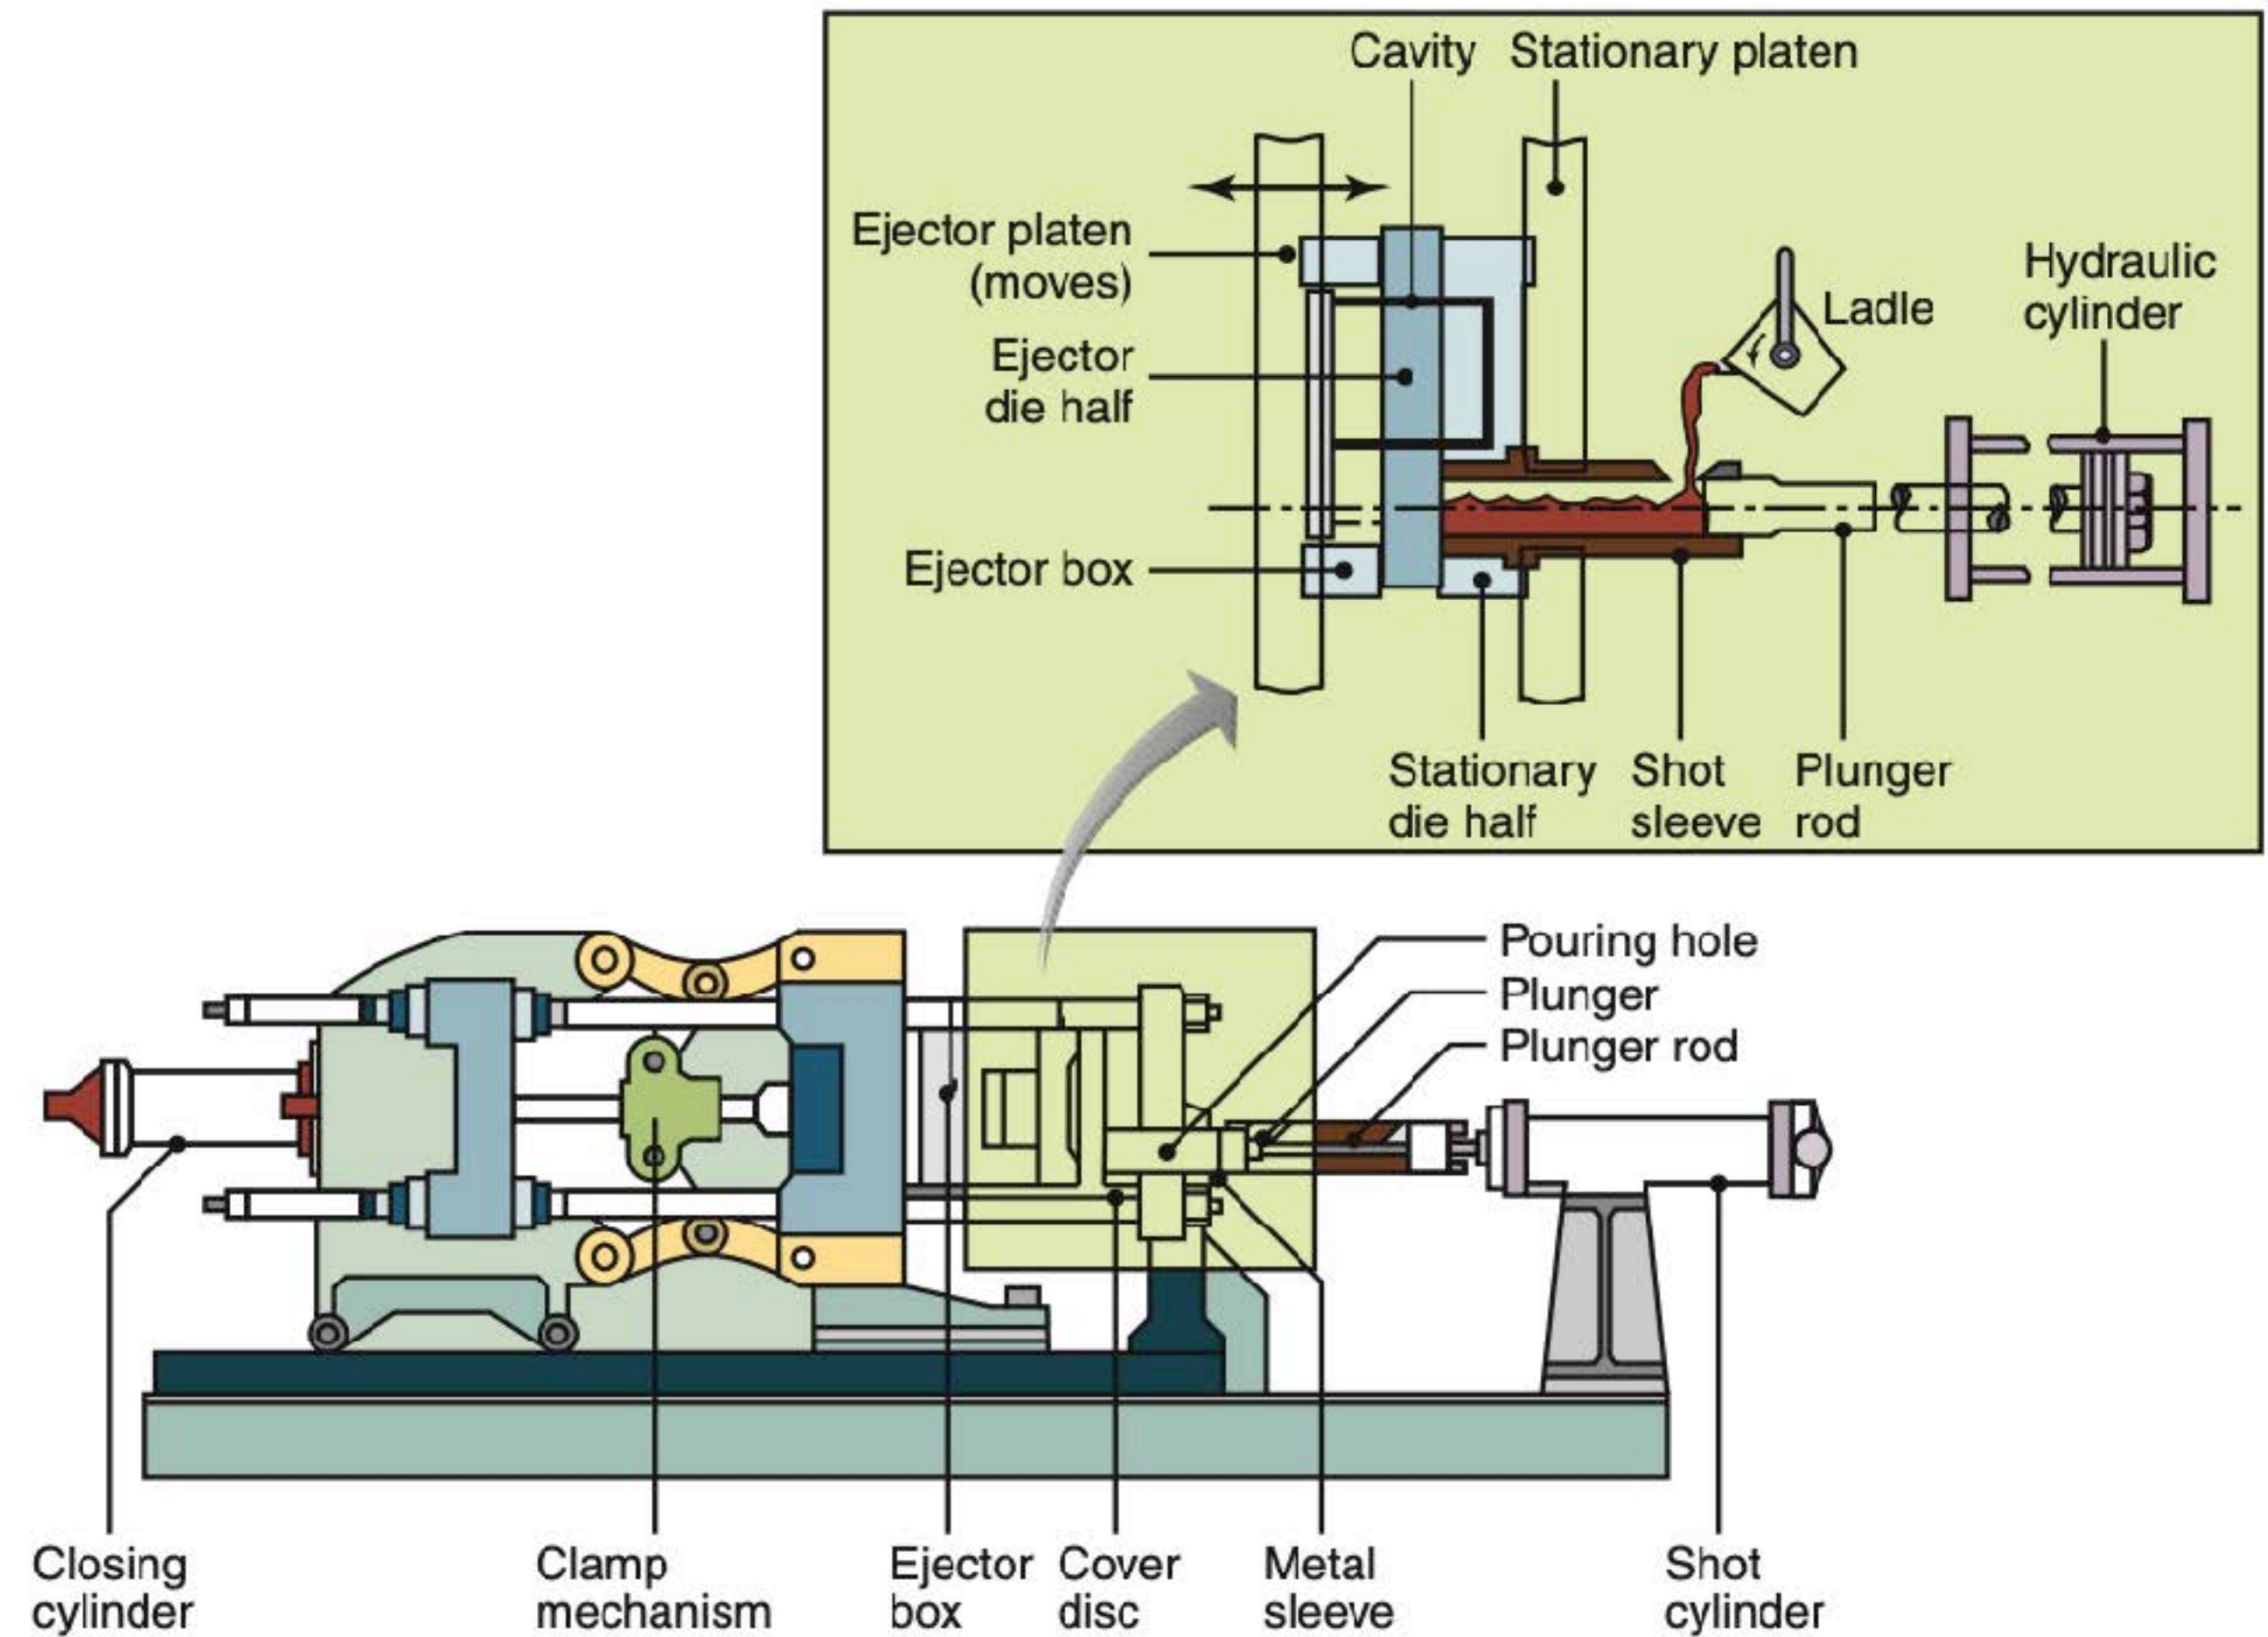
Schematic illustration of the cold-chamber die-casting process. These machines are large as compared to the size of the casting, because high forces are required to keep the two halves of the dies closed under pressure.
